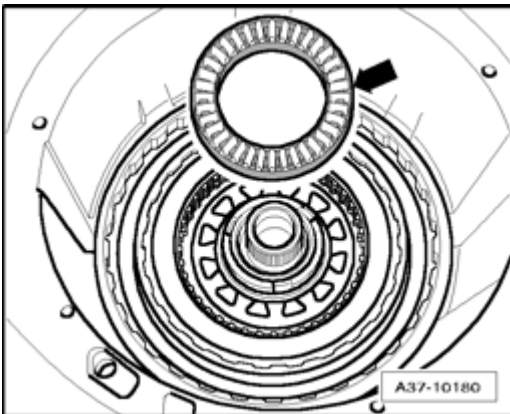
Needle Bearing For Tower "II" Placed On Cylinder "C" Of Tower "I"
